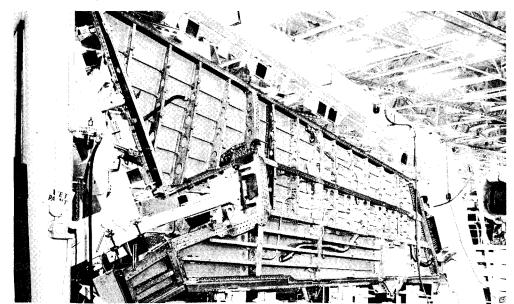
Rib Construction and Arrangement in High Speed, Swept Wing, Fighter Type of Aircraft. North American Aviation - Navy Fury - Jet Airplane.
